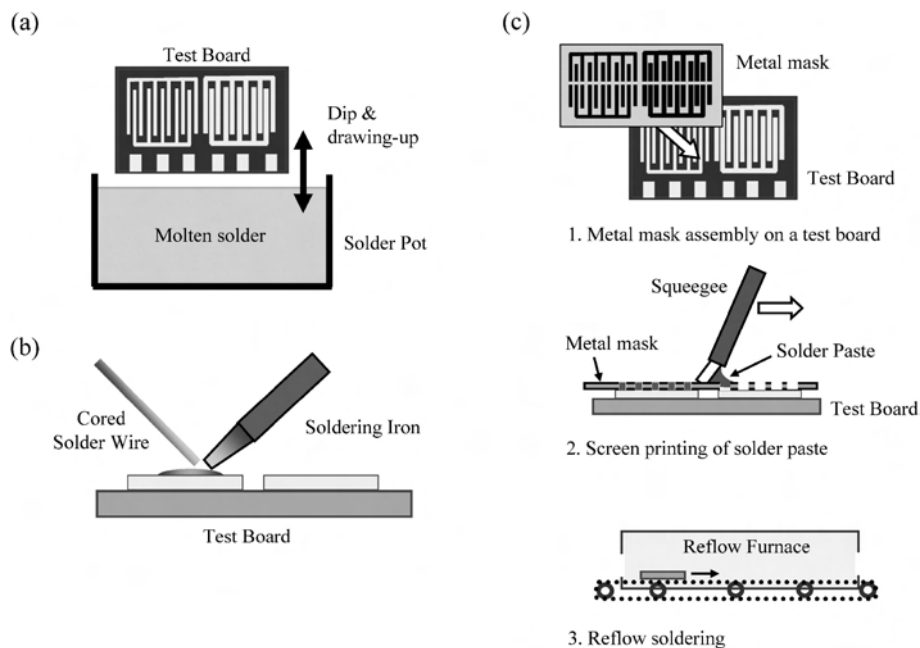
Schematic diagram of soldering methods, (a) dip soldering, (b) hand soldering, and (c) reflow soldering.
